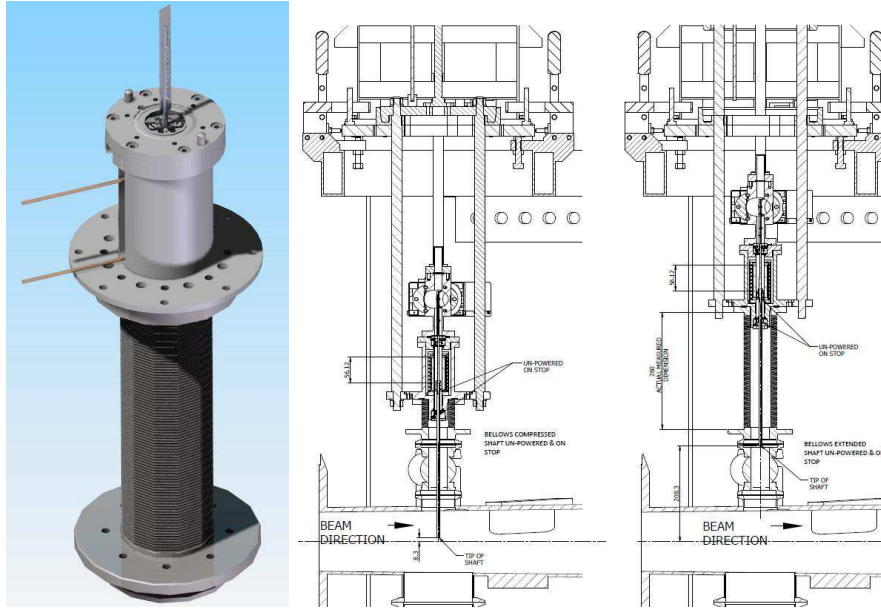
(left) Bellows shown assembled under core tube body; (right) Compressed and uncompressed bellows states.
